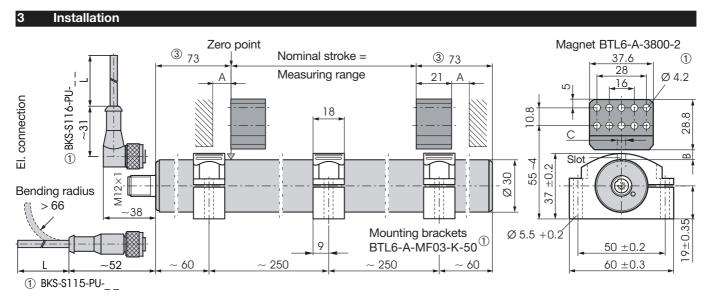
Dimensional drawing (BTL6...A1-S115 transducer with floating magnet BTL6-A-3800-2 and mounting brackets BTL6-A-MF03-K-50)
